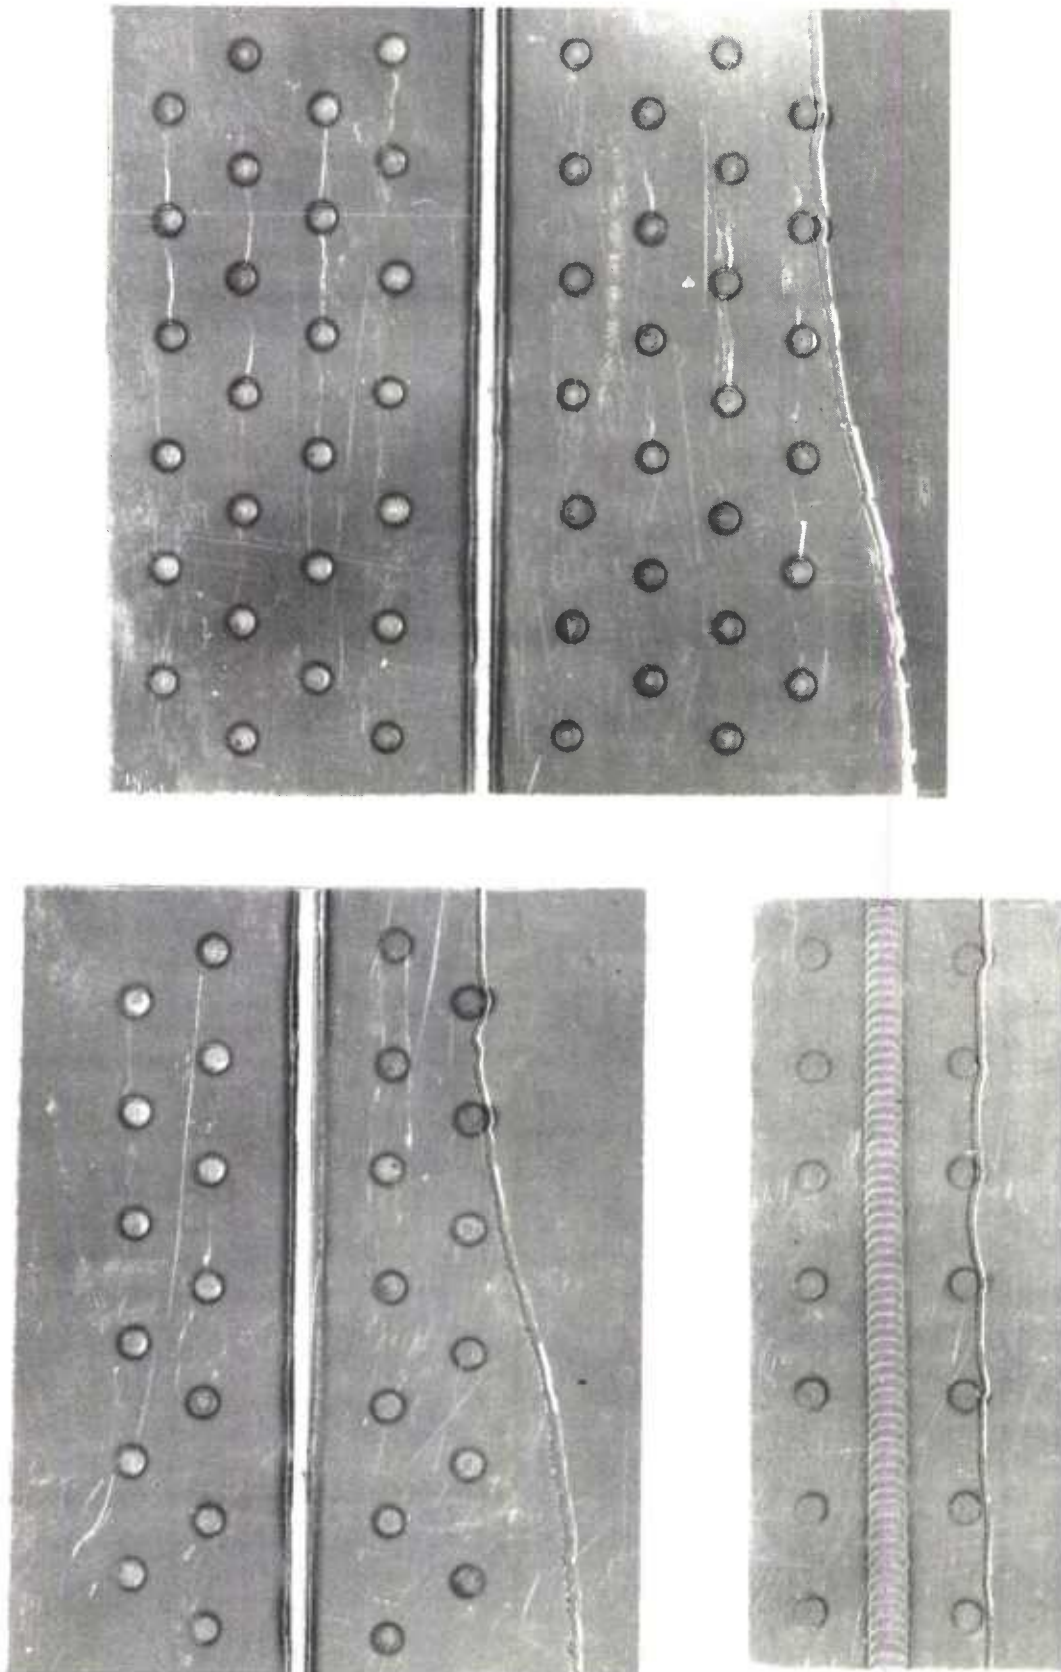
Fractured Fatigue Specimens - AM-355 SS (-423° F)
